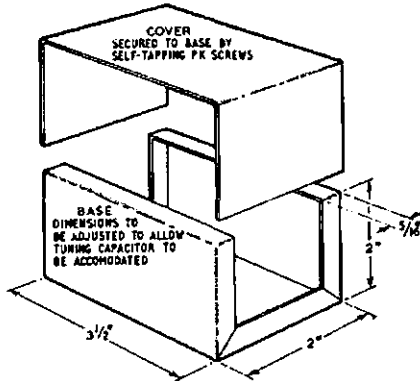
General construction of oscillator chassis/box assembly. To be secured to the main chassis by PK screws. Clearance hole to be cut in chassis to allow passage of leads from oscillator. Ventilation holes 1/4 in. diameter to be drilled in main chassis directly under oscillator valve position. Material: 18 s.w.g. or 18 s.w.g. aluminium.
